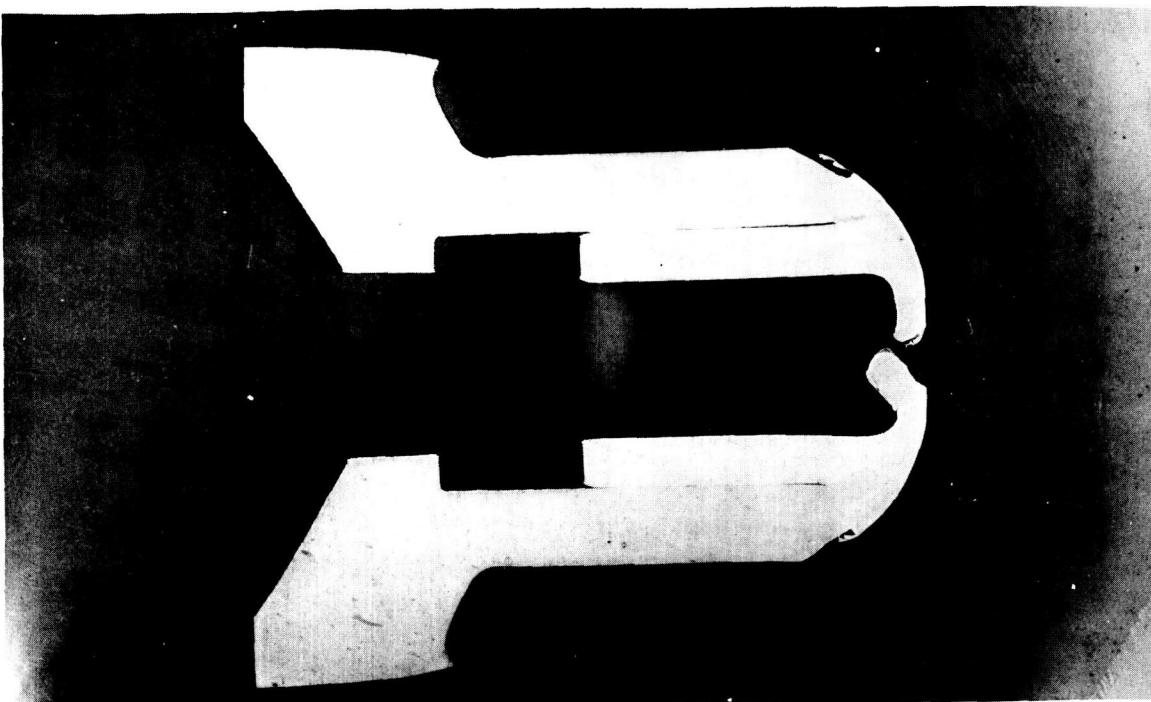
Cross Section of L-605 Alloy Insert Support Tube Shown in Figure 34. Note that the Weld has Remained Intact, Although Severe Deformation of the Short Length of Failed Tube has Occurred.
